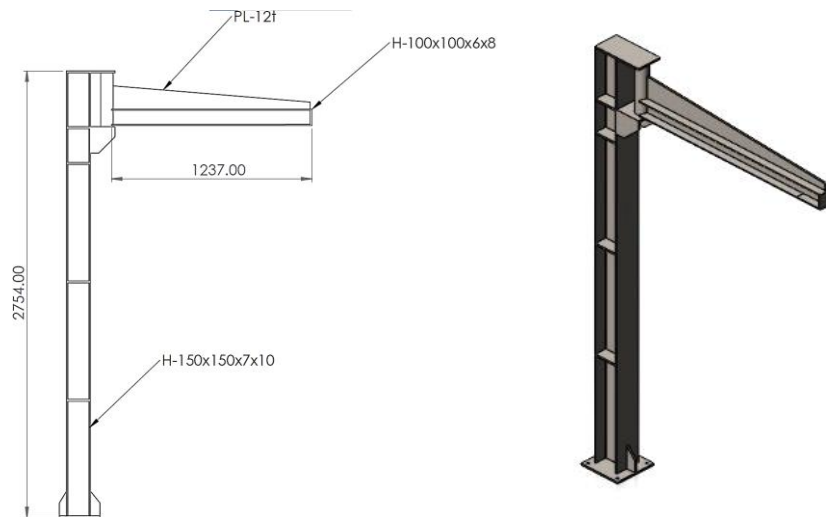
Type-3 Jib Crane; Swing arm beam H-beam 100x100x6x8 mm with a stiffener plate 12t mm.
